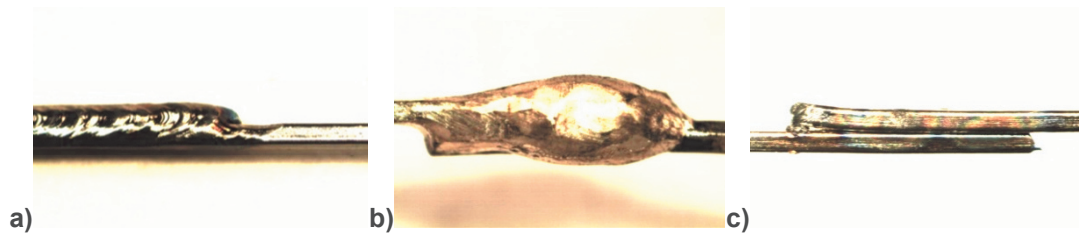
Macroscopic examination magnif.20×, a) welding in argon envelope, b) soldering, c) heat sealing
